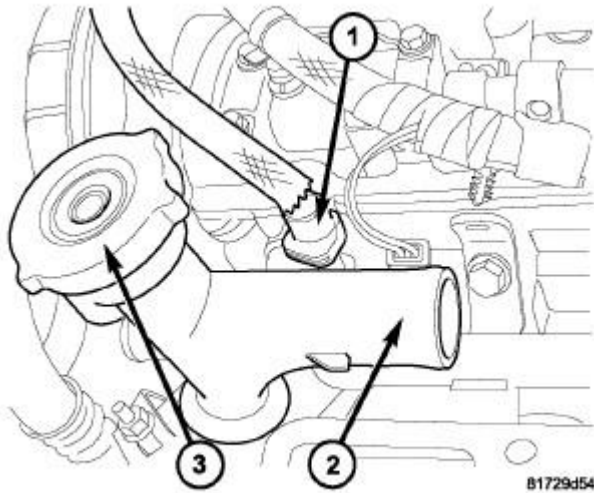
Upper Radiator Hose To Coolant Outlet, Radiator Cap & ECT Sensor Connector
